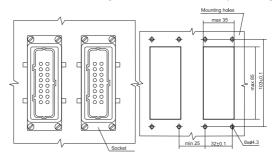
Mounting way of the plug-in socket on the injection mould for the SR11-6XXXX system including 4, 5 or 6 BR11 controllers or for SR11-8XXXX including 7 or 8 BR11 controllers.
